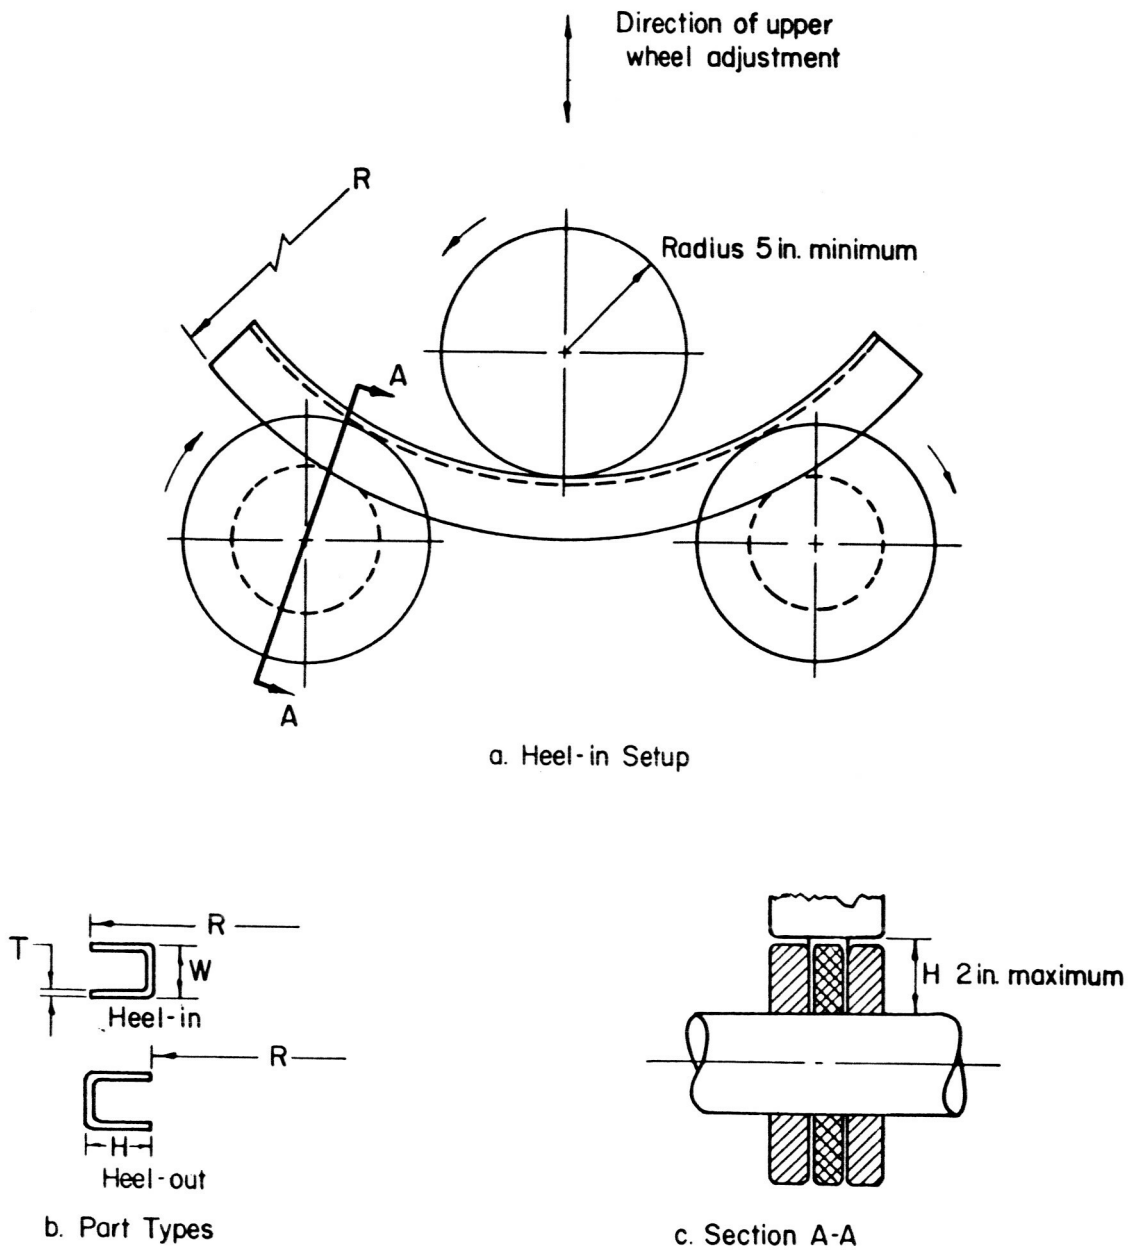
PART TYPES AND SETUP FOR ROLL BENDING (REF. 33)
